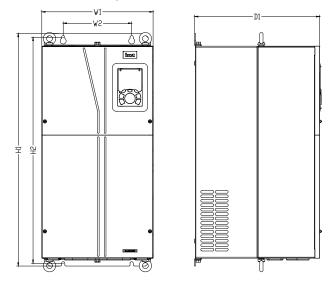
Wall installation diagram of VFDs of 460V 75–110kW
